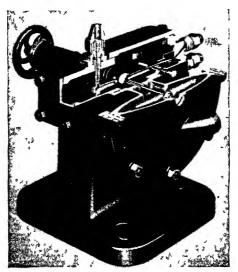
Regulator that controls suction-valve prerotation vanes, hydraulic coupling, or motor resistance.
